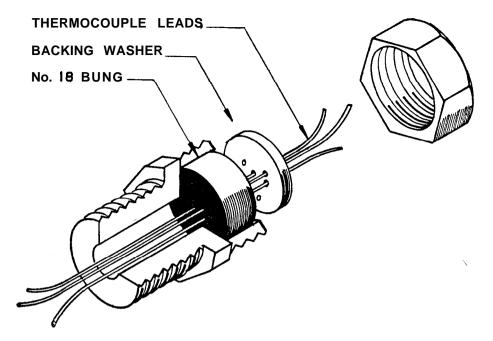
Method of Introducing Thermocouples into Sterilizer Chamber Suitable for Up to 6 Twin Core Thermocouples
